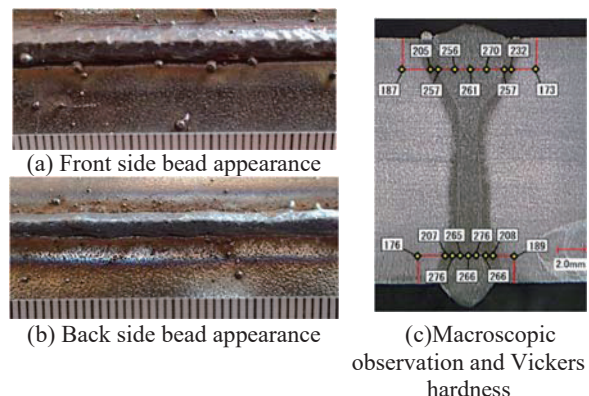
Weld bead fabricated a test piece with a bevel by gas cutting.
